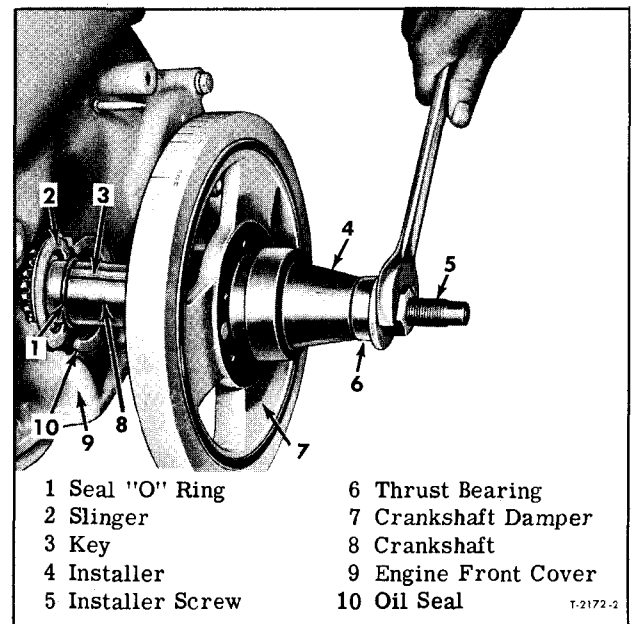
Installing Damper on Crankshaft with Special Tool Set
